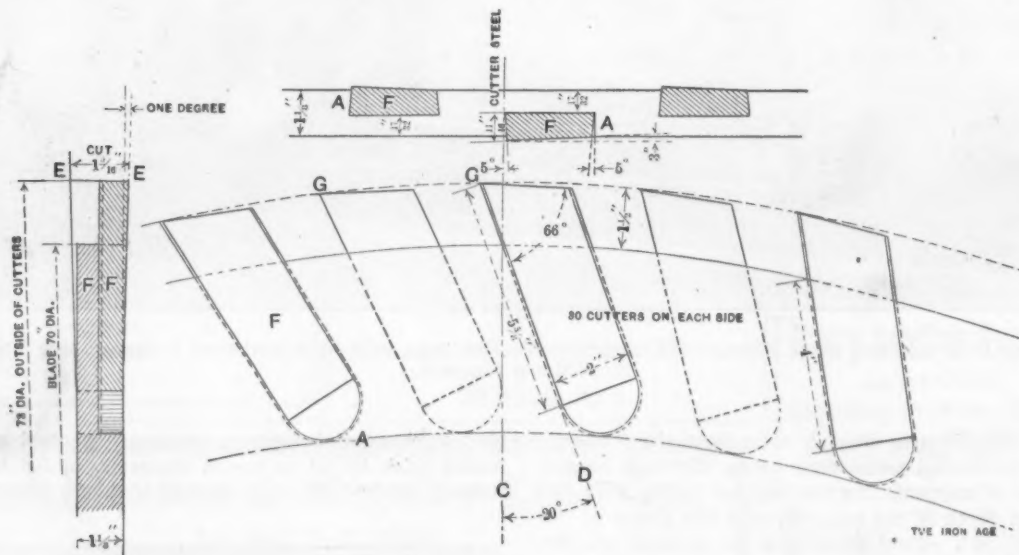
Details of the Tindel-Morris Saw Blade.
